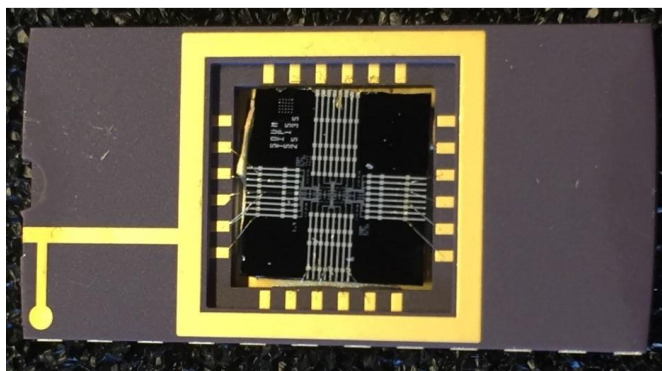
Gas sensor chip assembly by wire bonding in a chip carrier.
